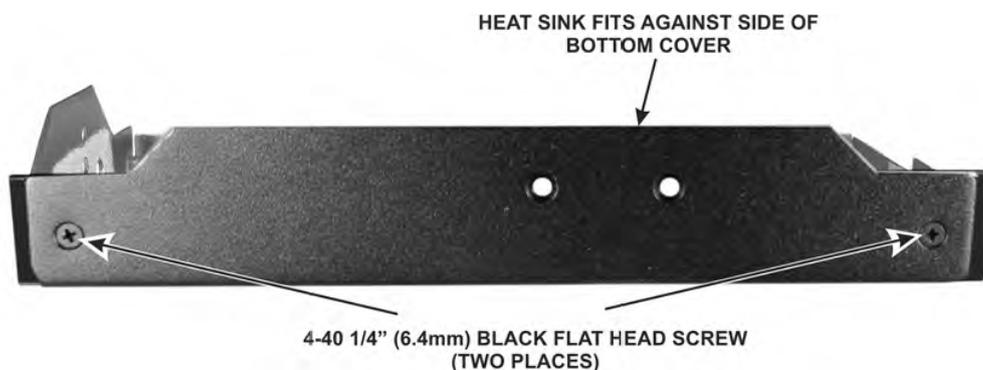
Mounting the Heat Sink on the Bottom Cover.
